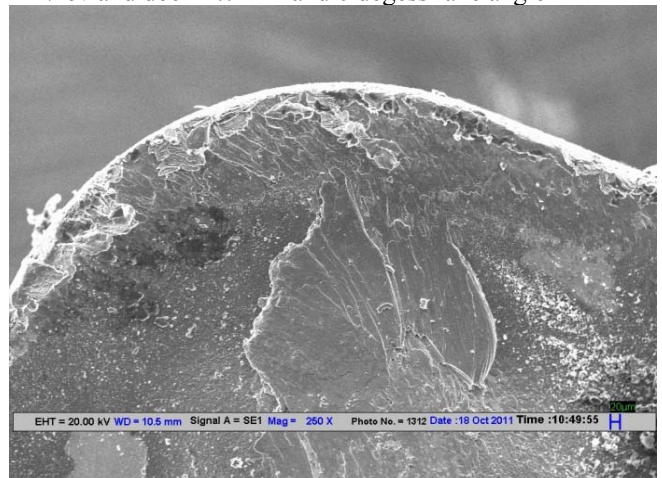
SEM micrograph of cutting tool insert under the following cutting conditions: V=100 m/min; f = 0.2 mm/rev and doc =1.1 mm and 0 degess rake angle
